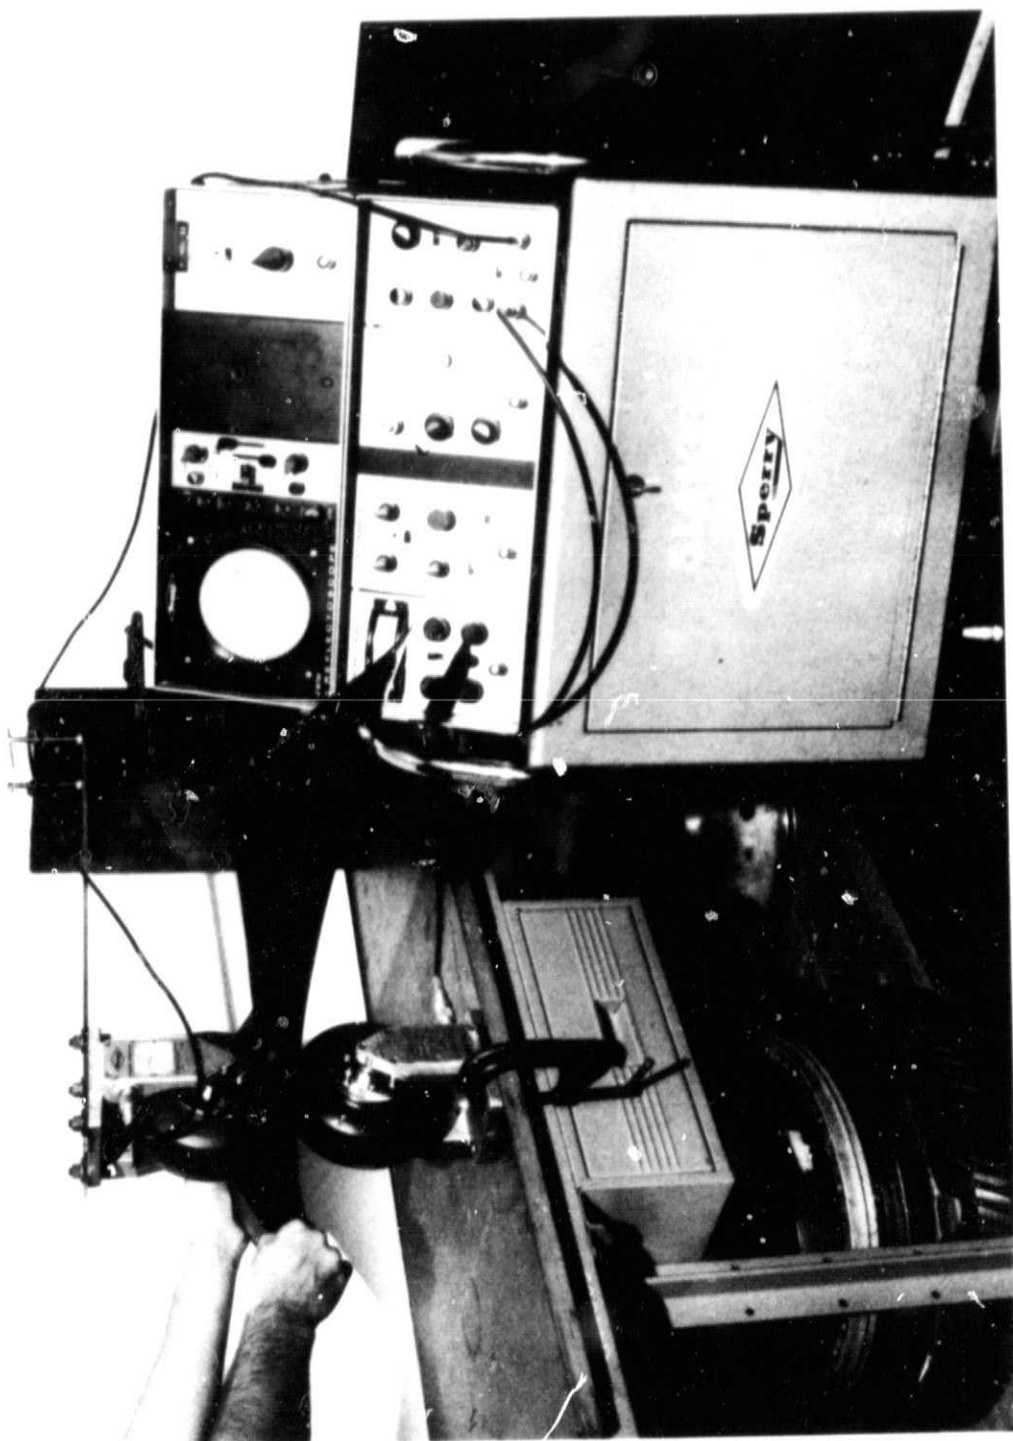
Composite Fan Blade - Airfoil Ultrasonic Inspection
